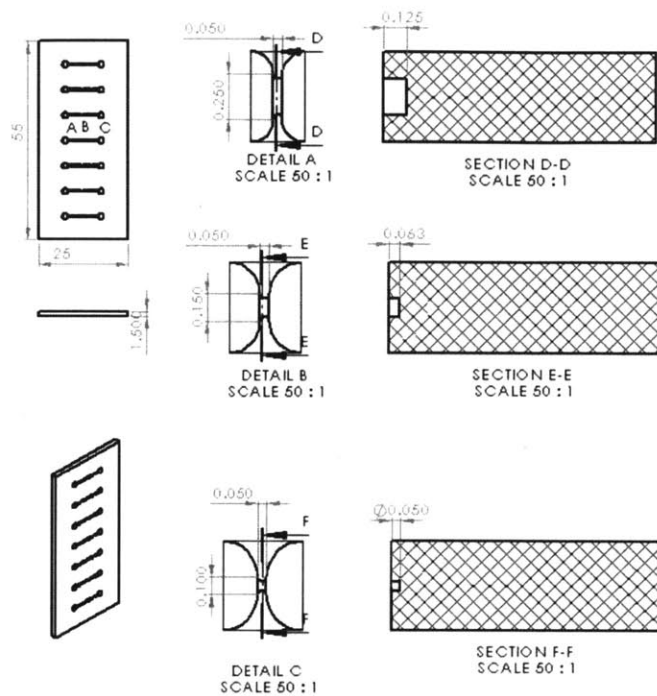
Channel 1 with Details on the Dimensions of all Constrictions
